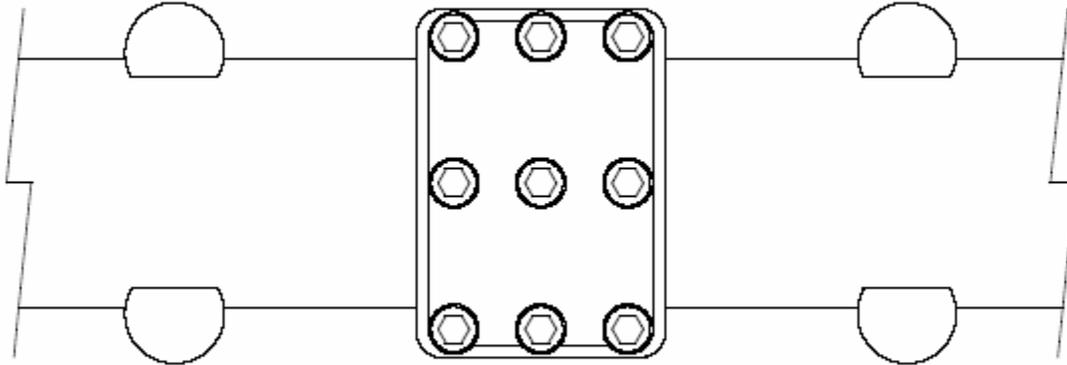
Drawing of the proposed clamp assembly for the MI bus bars.
